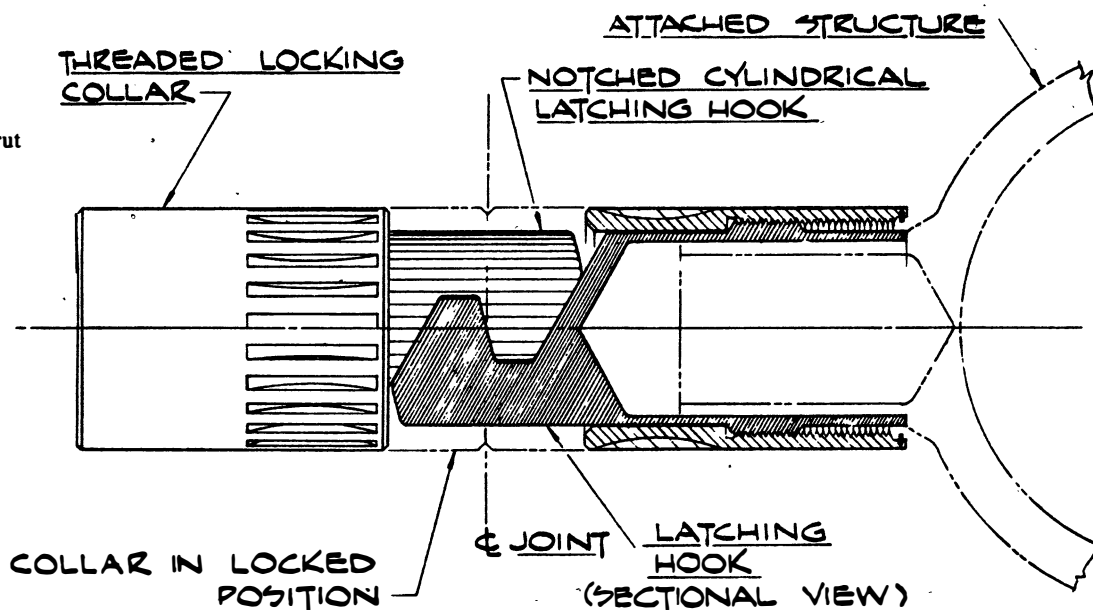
This is a well-known mechanism, generally secured by a single outer sleeve. However, since in an androgynous connection both sides must be identical, two threaded sleeves are used. This choice offers a bonus: the two can be tightened against each other to minimise play in the joint. Once the ends are brought together by hand, advancement of the first collar holds the assembly firmly enough to simplify operation of the second collar and subsequent tightening.
